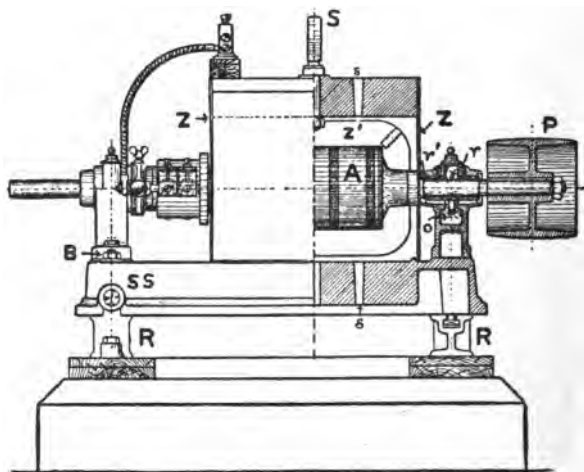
Lahmeyer Machine. (Side elevation : part section.)
